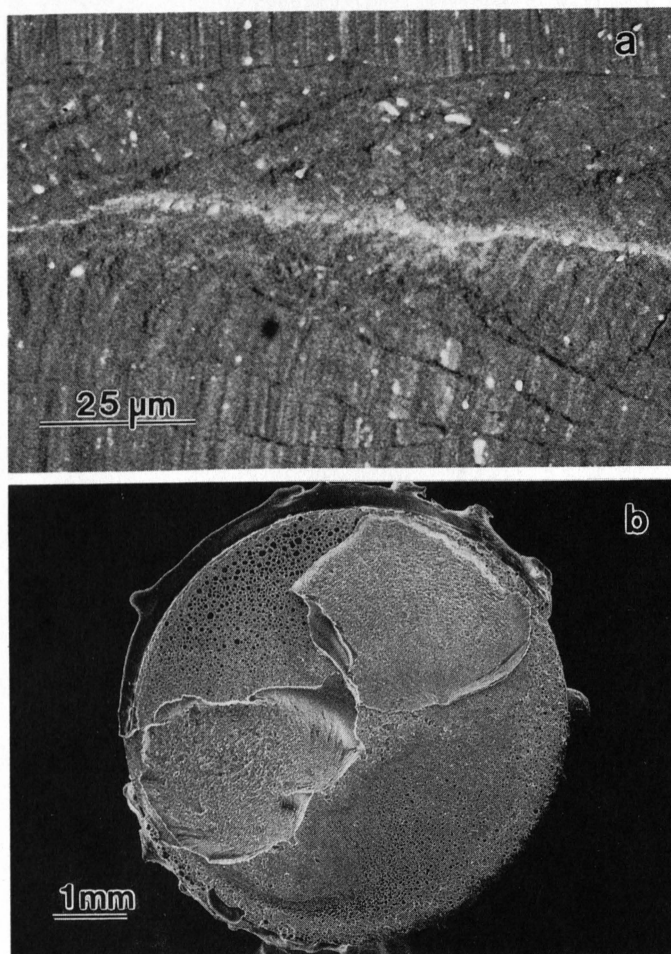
(a) SEM micrograph of CDW cross-section and (b) fracture surface at the weld interface for AlTi.
